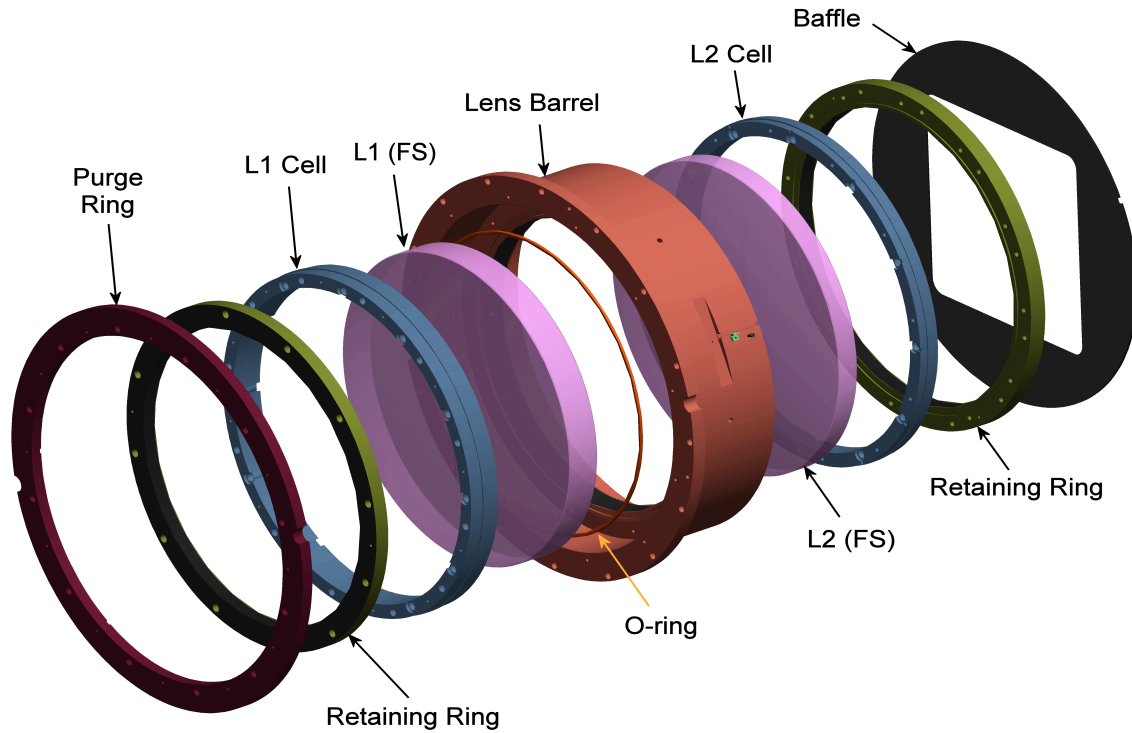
Exploded view of the window field lens assembly. It attaches to the front flange of the vessel (Figure 6). Lenses L1 and L2 are held by roll pin flexure cells as shown in Figure 7. The cells are screwed into the barrel. Retaining rings, screwed into the cells, clamp each lens onto a contoured ledge in its cell. The clamping forces were pre-determined and generated by a stack of Belleville washers. The L1 lens barrel holds two vacuum O-rings: one for the L1/barrel interface, the other for the barrel/front flange interface. The light baffle helps to reduce stray light. Dry air enters the purge ring and is blown over L1.
